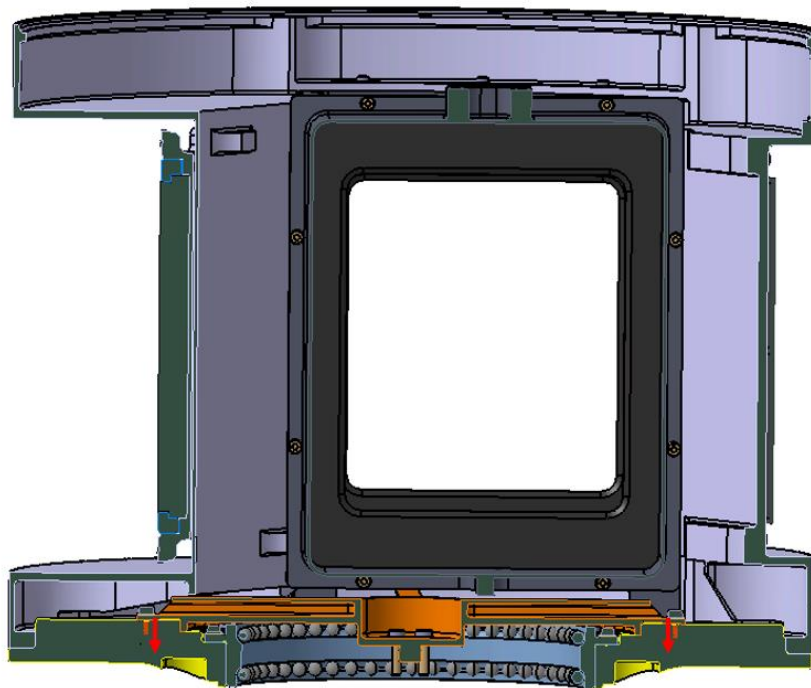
Grounding of Carousel (yellow) and Bearing Cover (orange) – cut view
